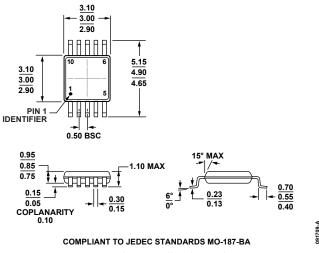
10-Lead Mini Small Outline Package [MSOP] (RM-10) Dimensions shown in millimeters
